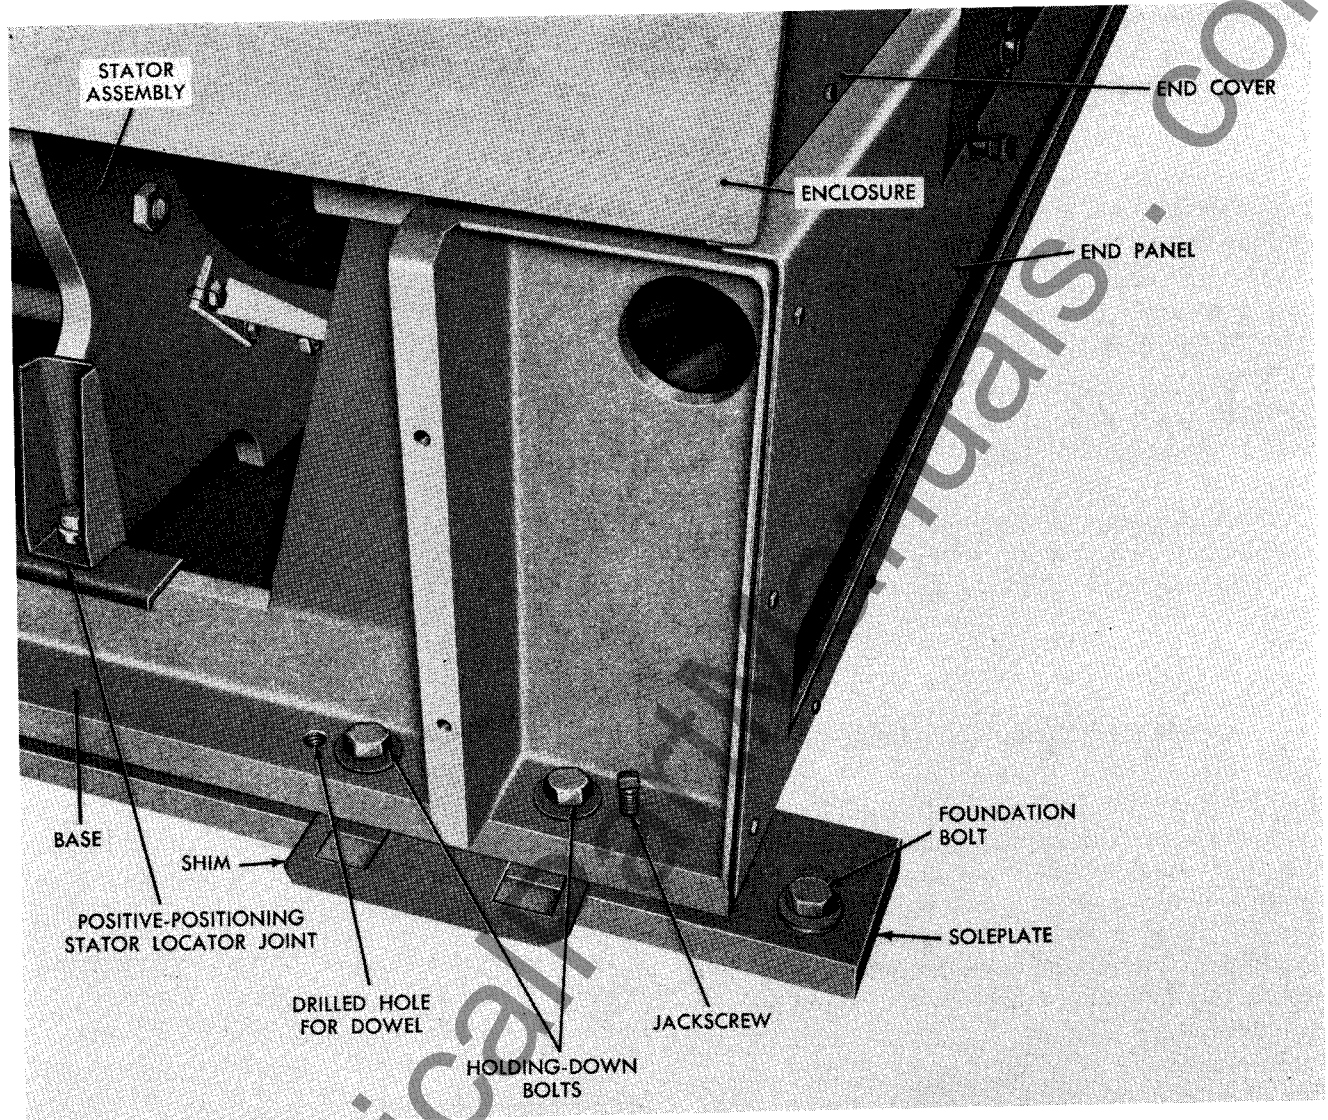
View of F/A Motor with Side Panel Removed; End Opposite Shaft-Extension End
